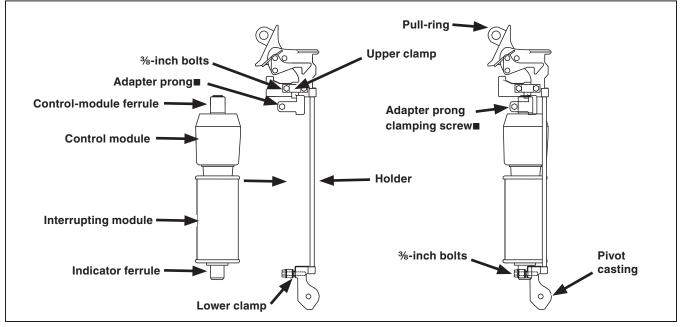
Installing the control module and interrupting module assembly in holders for S&C TransFuser Mountings.▲
